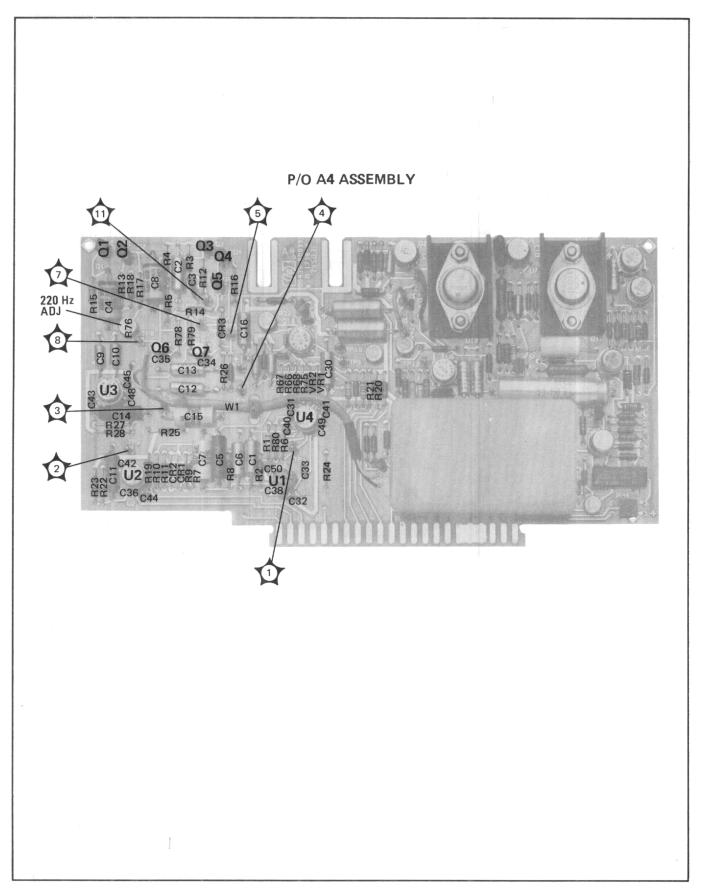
P/O A4 Assembly (AC Ampl/Sync Detector) Component Locations
